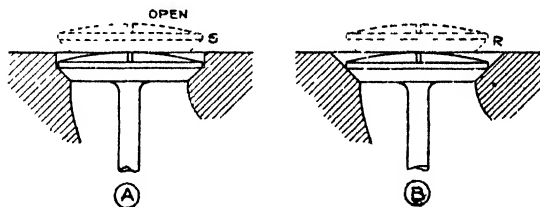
Showing (A) Pocketed Valve. (B) Surplus metal removed from Seating.
